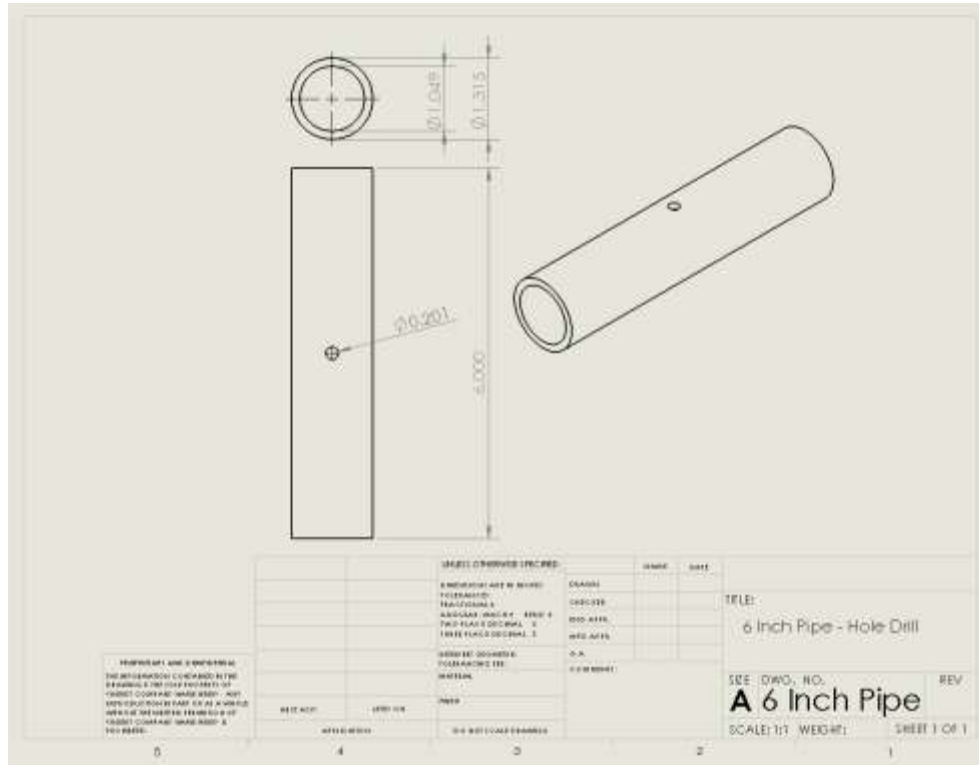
PVC straight Pipe Drilling engineering drawing (all of the dimensions are manufacture in +/- 0.05 tolerances -not shown in the drawing-)
